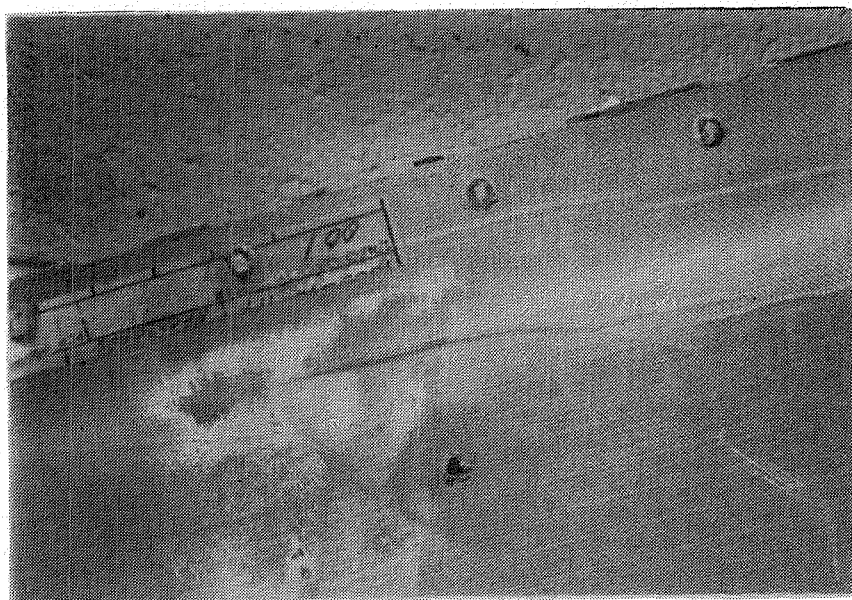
Air Canada Left-Hand Aft Engine Fairing - Frayed Edge and Intercostal Holes.
